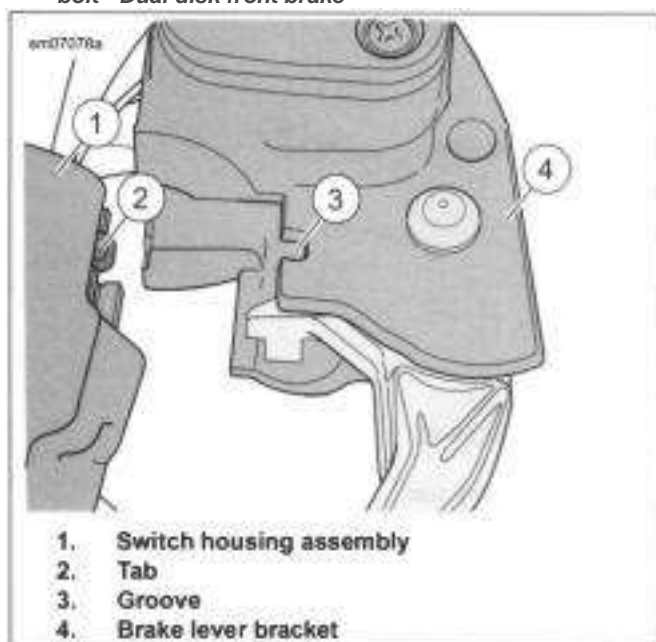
Attach Master Cylinder to Right Handlebar Switches
